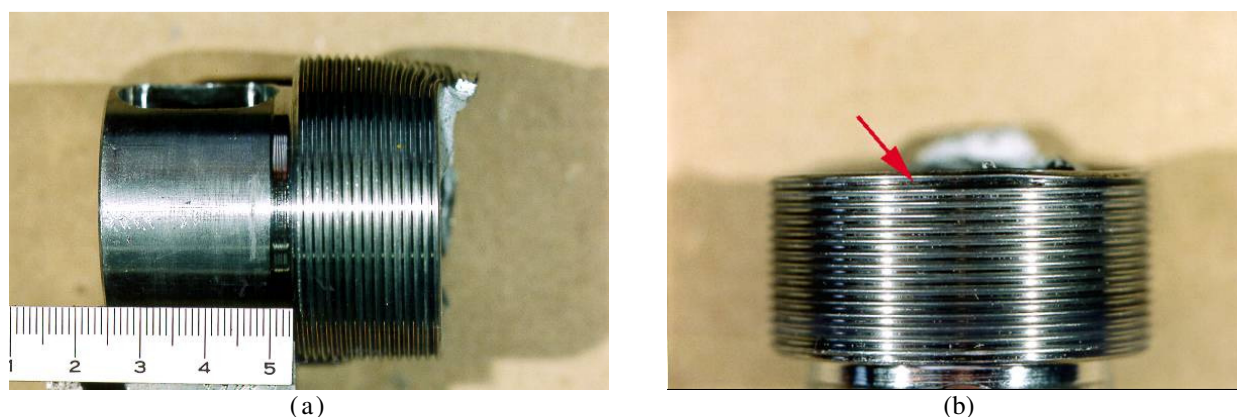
(a) Profile of the fractured shaft. (b) The red arrow indicates the main crack parallel to the cross-section of the component
